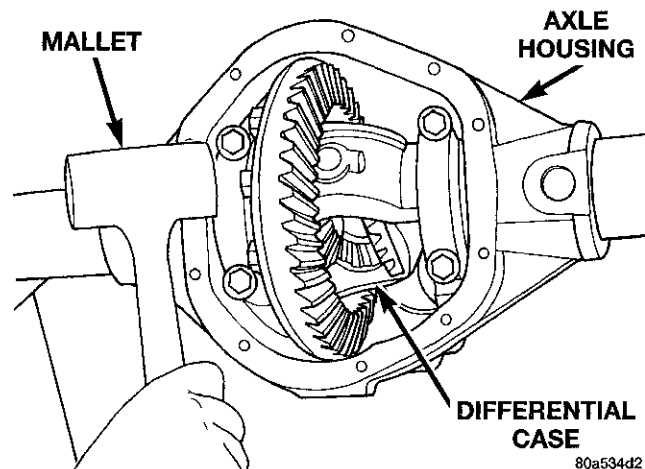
Seat Pinion Gear Side Differential Dummy Side Bearing
